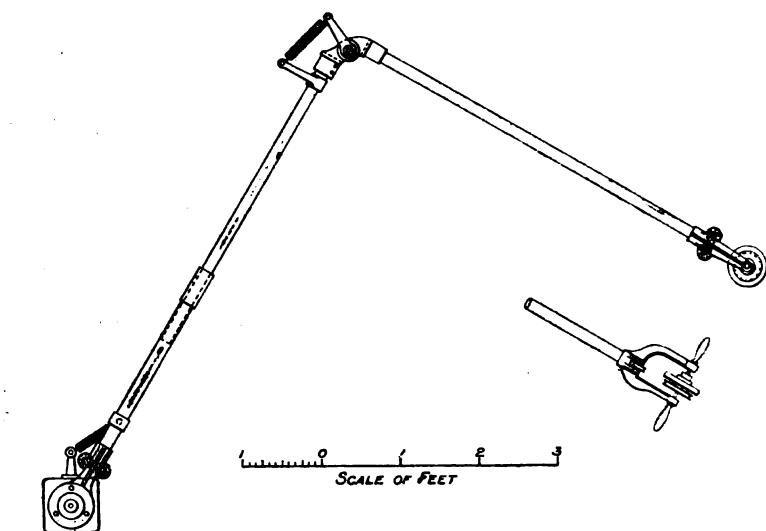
Portable Electric Grinder, for dressing seams and rows of rivets in plate-work, Motor on floor driving wheel by twisted leather belt inside tubes.
